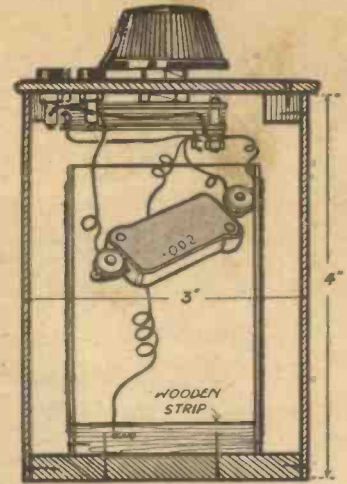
Sectional view of the unit showing how the coil is mounted.
